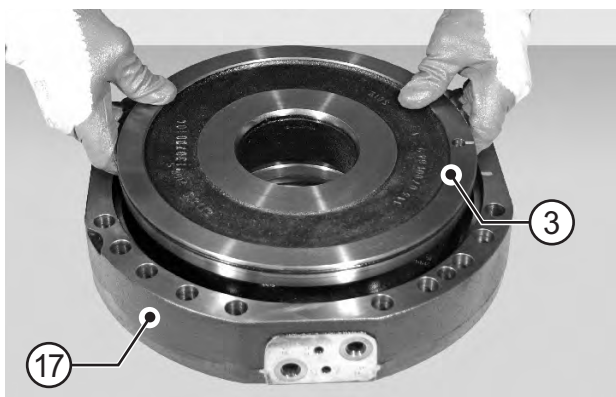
Check the position of the anti-extrusion (18) and o-rings (2) and (4). Lubricate the piston and the o-rings and install the unit (3) into the cylinder (17) .
